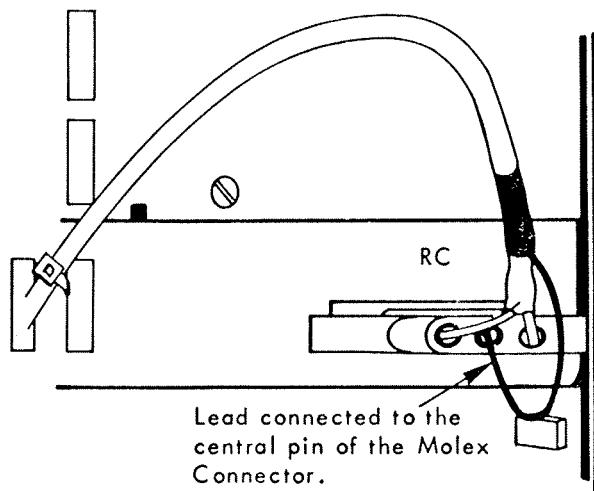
REMOTE CONTROL CABLE - CABINET SIDE
